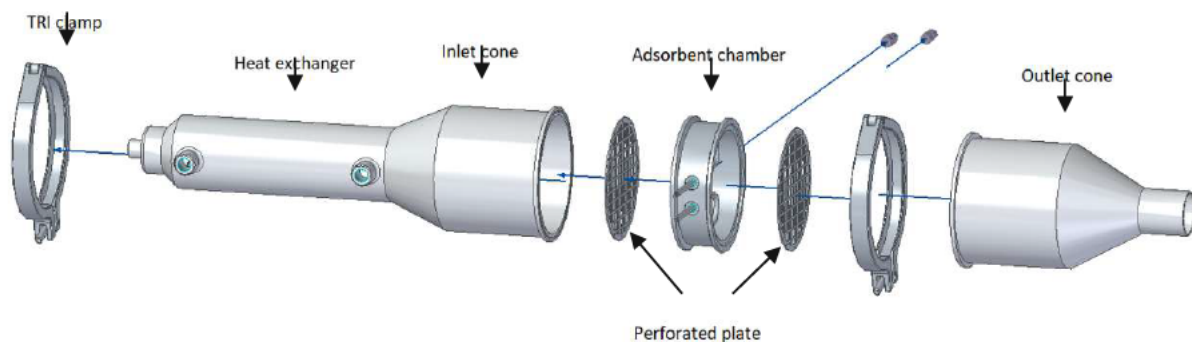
Exploded-view drawing of the prototype in adsorption mode
